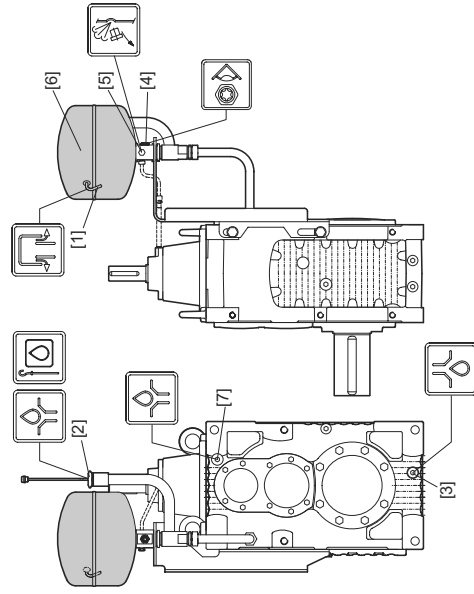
MC.PE./MC.RE., industrial gear units with steel oil expansion tank
